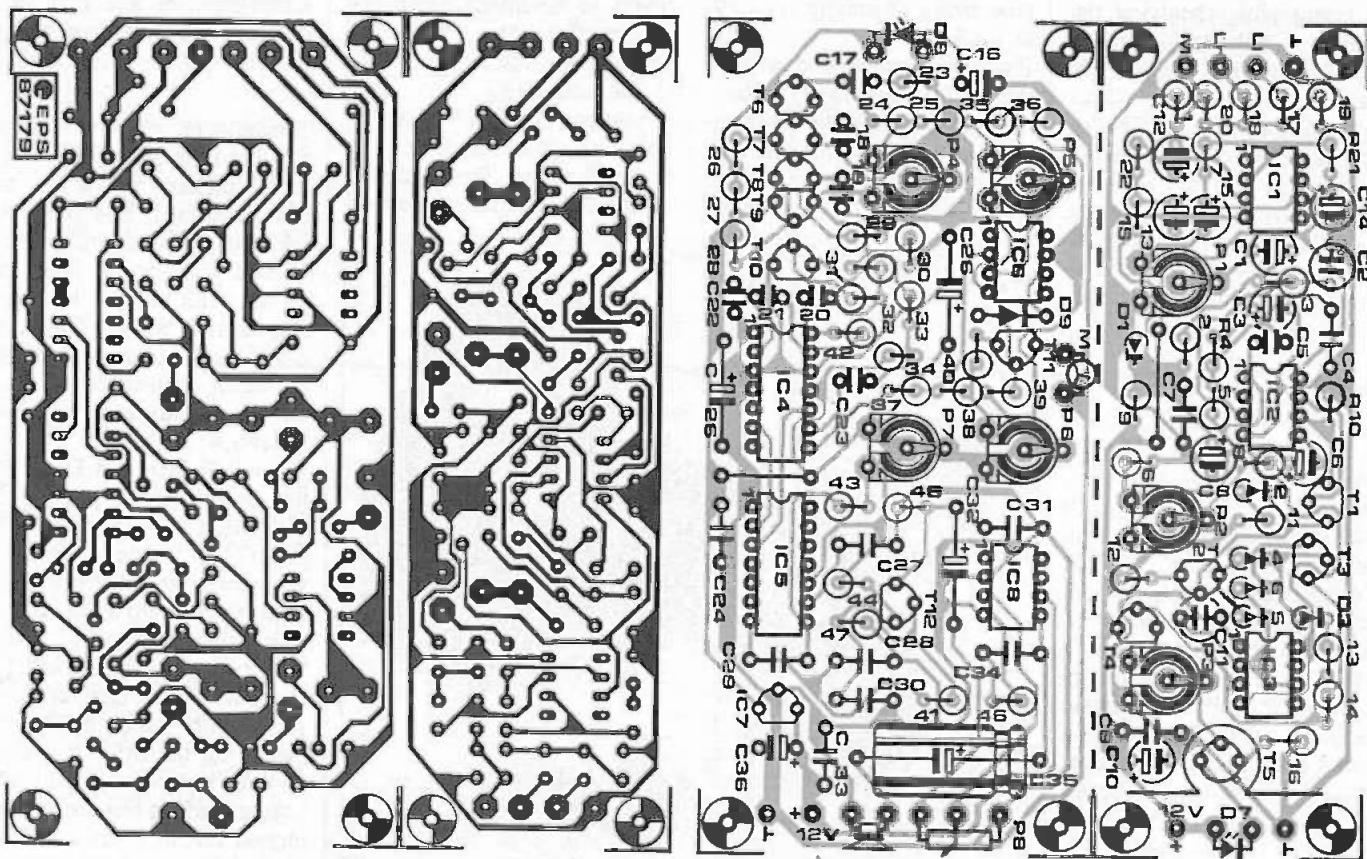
Track layout and component mounting plan of the PCB for building the IR transceiver.
